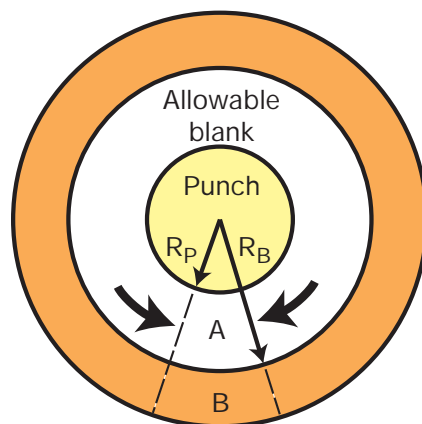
When deep drawing a cylindrical cup, each segment of the allowable blank (A) undergoes compression as the circumference decreases during flow toward the die radius. Excess blank (B) greatly increases the forming force, causing the cylindrical cup to break.
